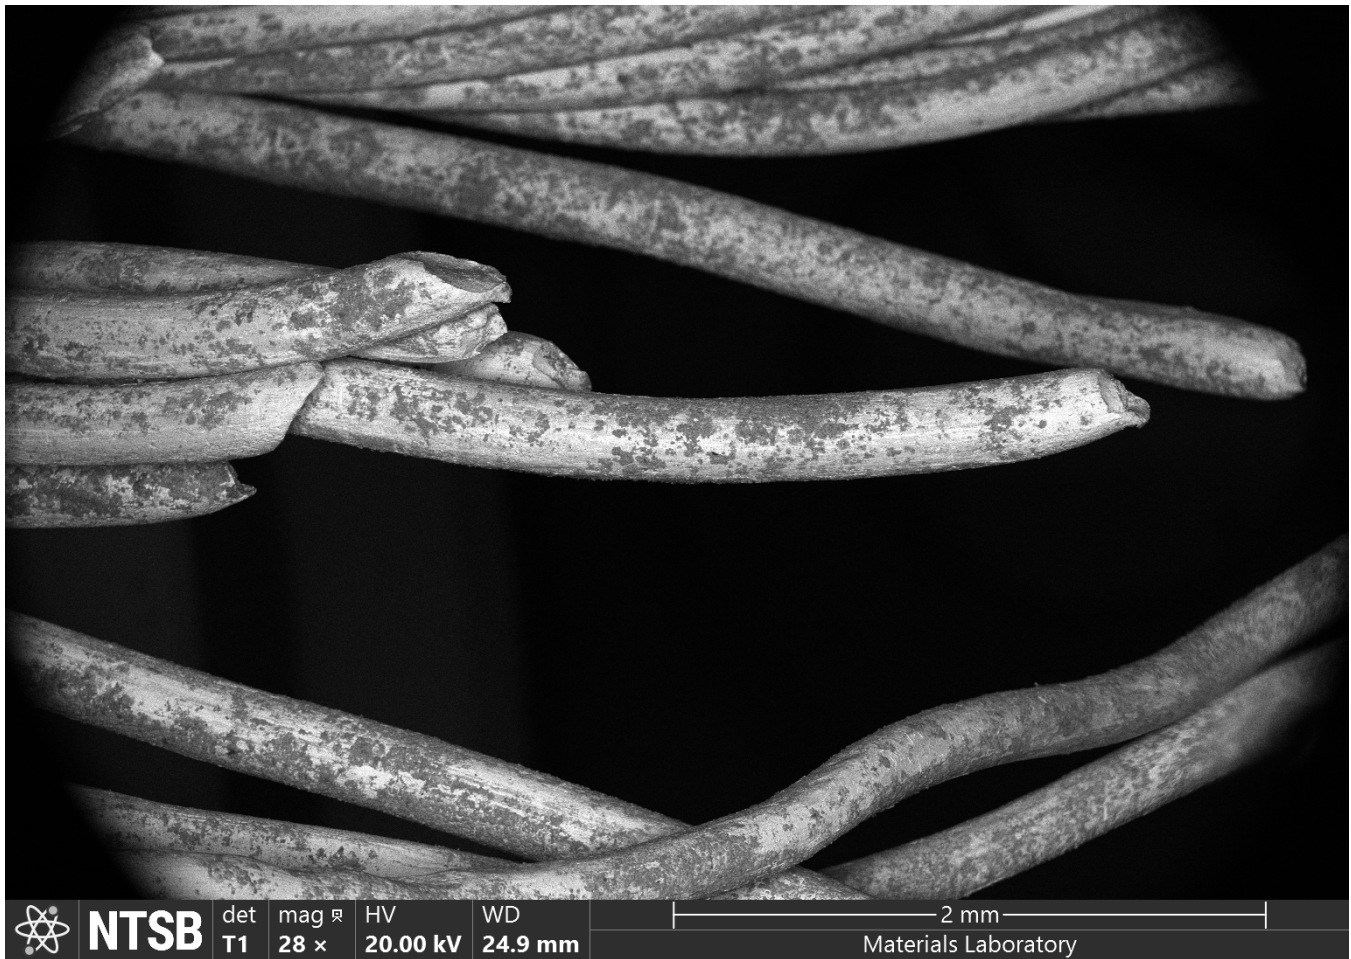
A backscattered electron image of typical wire fracture surfaces observed in cable 26.
